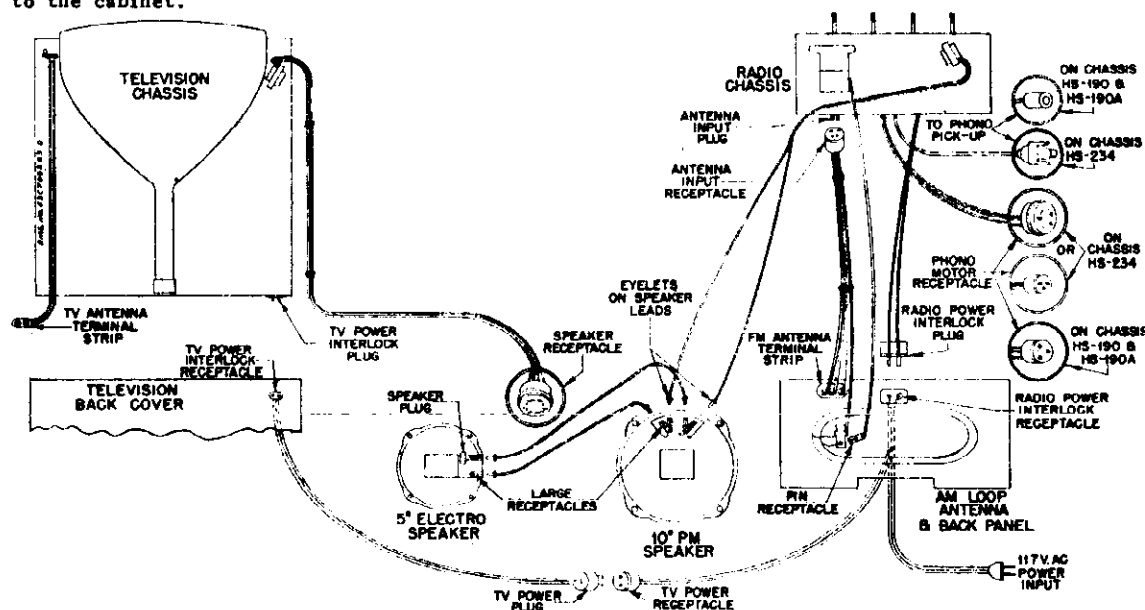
INTERCONNECTING CABLE DIAGRAM
